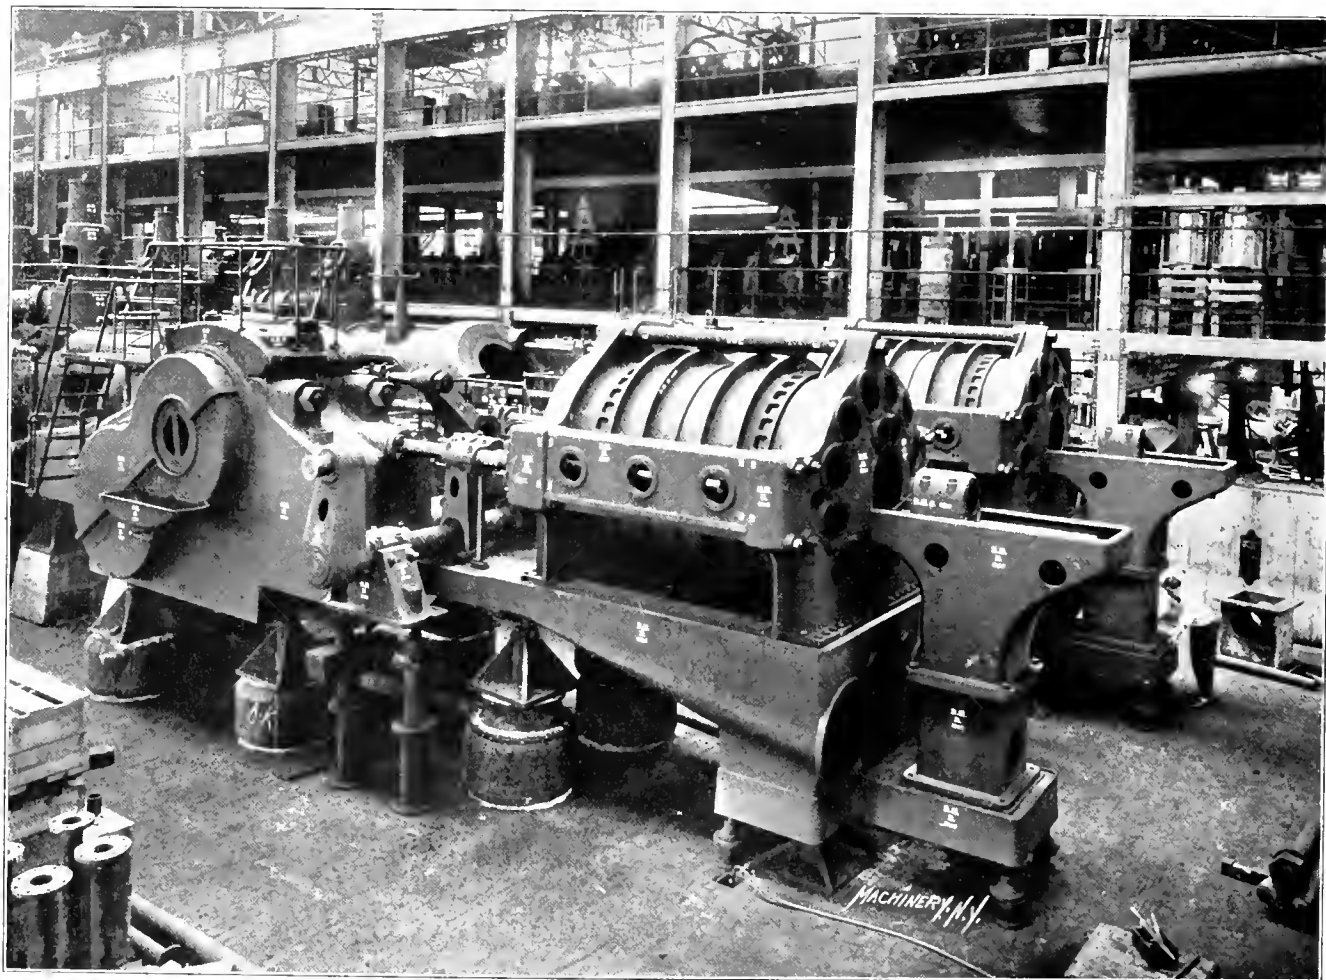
Another View of the Engines, taken during Erection, showing Blowing Cylinder and Main Bearings.
